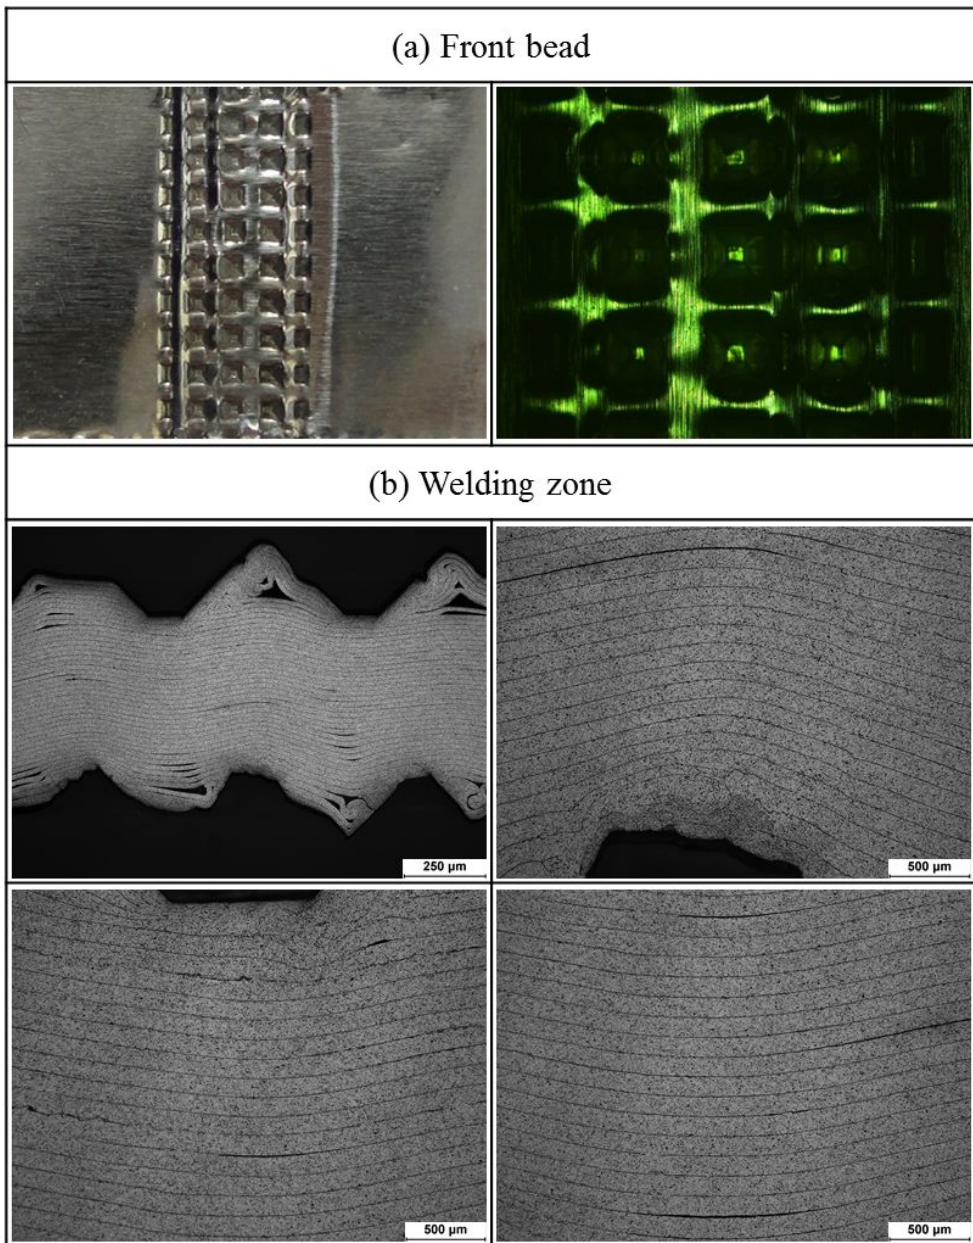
Front bead and welding zone of ultrasonic welding
